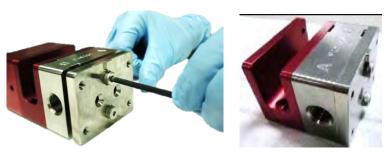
Assemble the Separation Block, Fluid Body and Seal Plate
